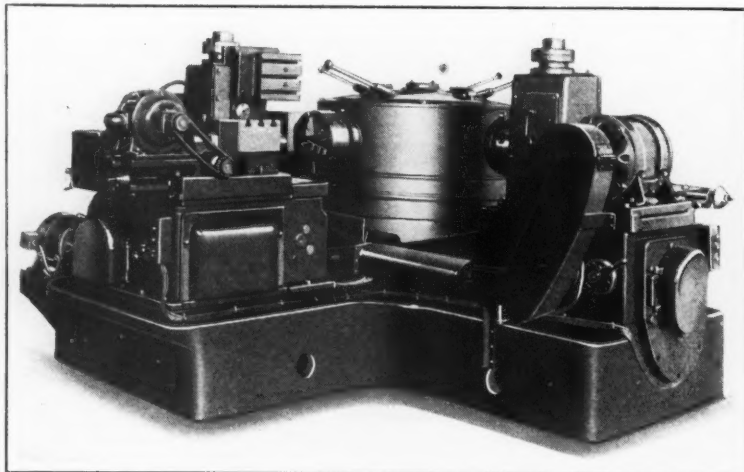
Work-rotating Chucking Machine as Seen from the Rear
